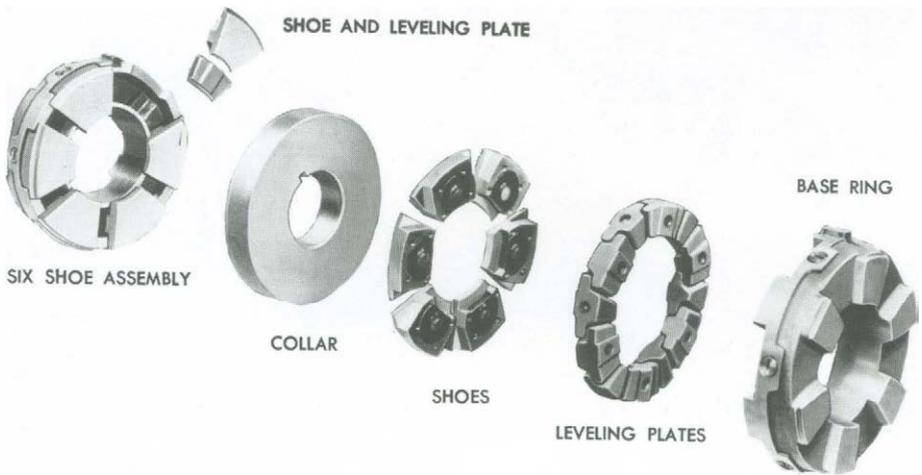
Small Kingsbury six-shoe, two direction thrust bearing. Left-hand group assembled, except for one shoe and 'upper' leveling plate. Right-hand group disassembled (Courtesy of Kingsbury, Inc.)
